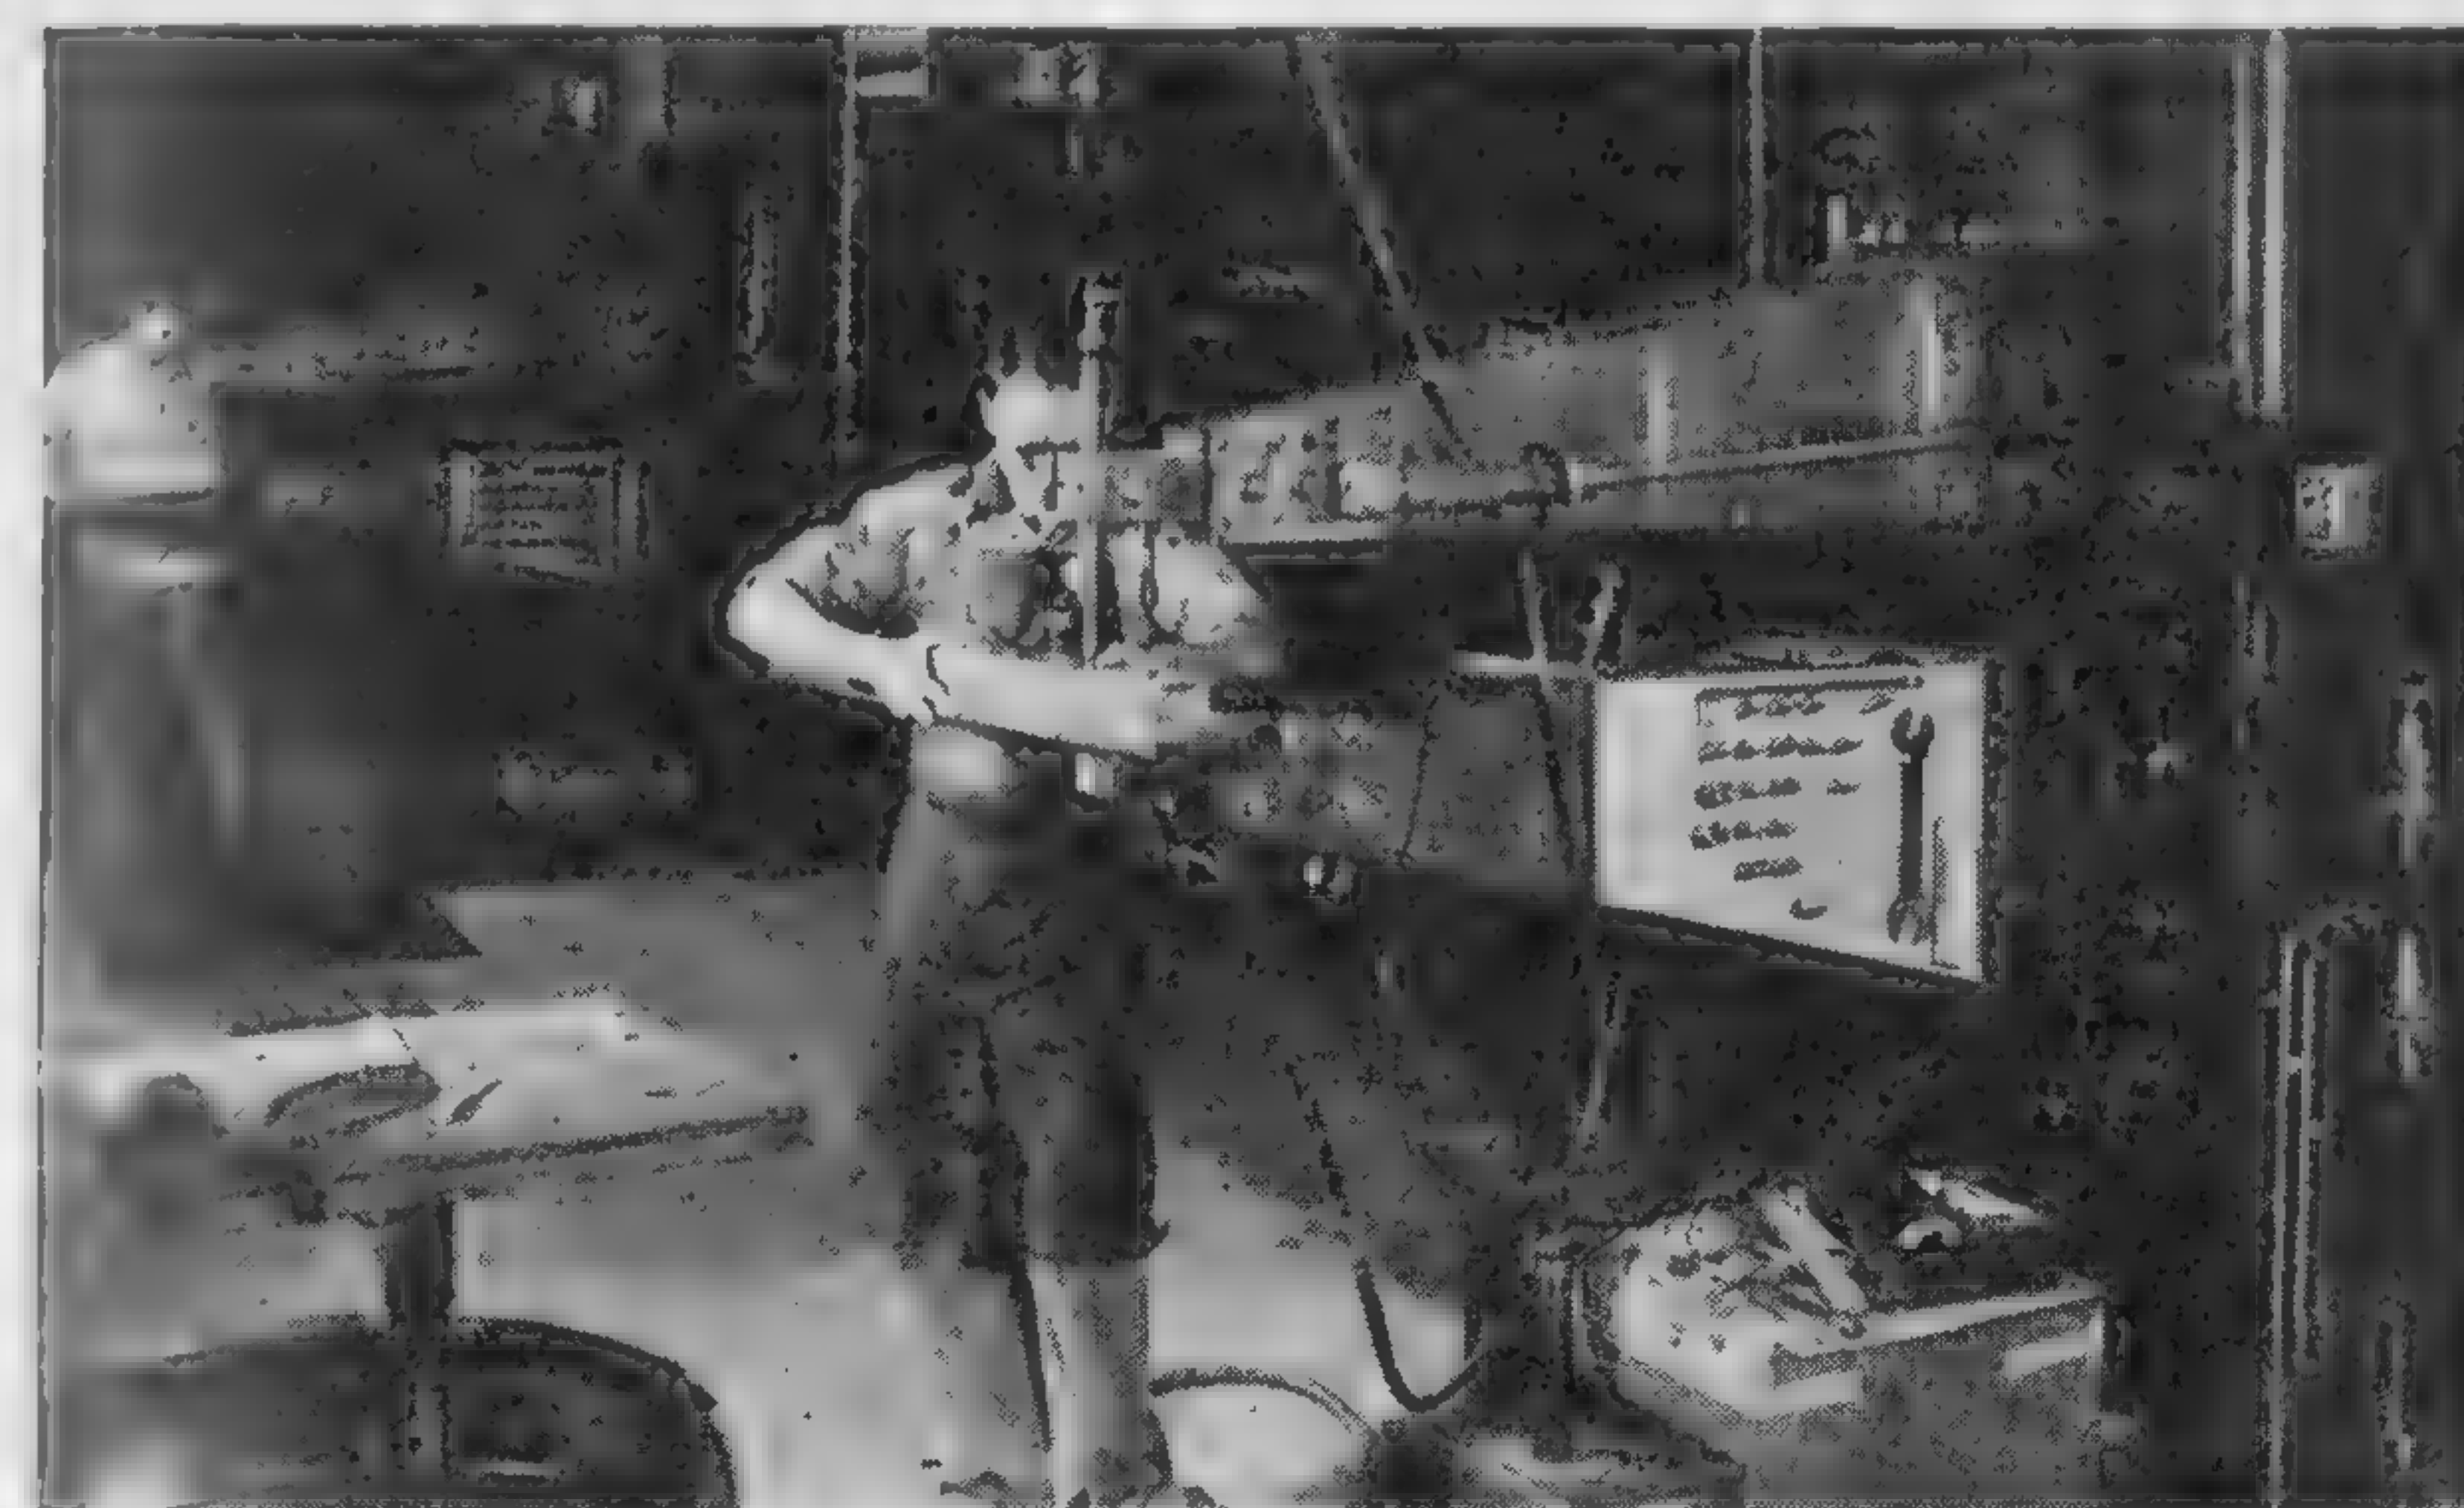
Better Quality of Spot and Seam Welds Has Resulted from the Installation of Two New Resistance Welding Machines in the Factory of Lockheed Aircraft Corporation, Burbank, California
